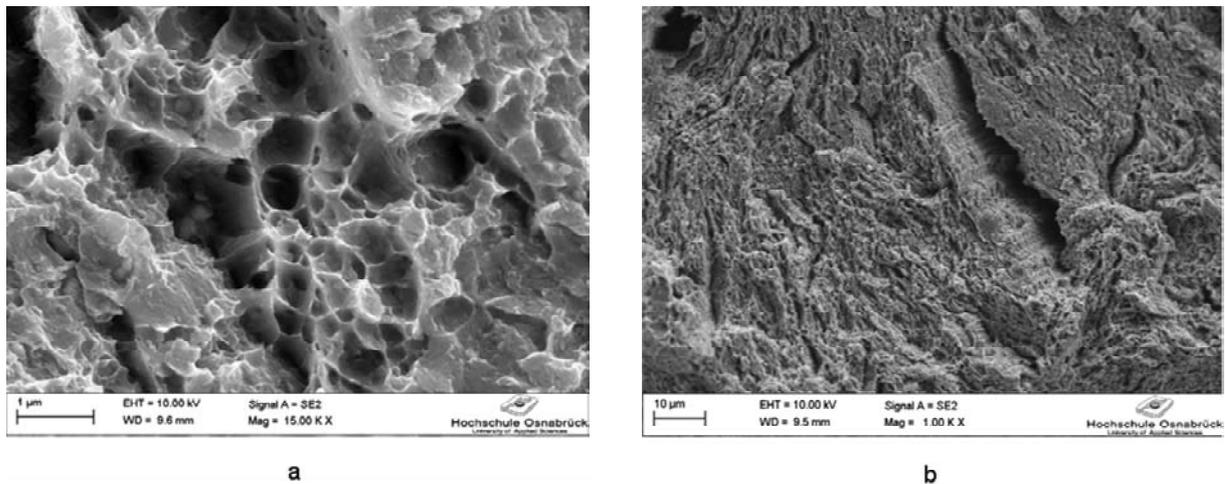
Fracture surface of the Al-ZnAl₂O₄ composite after tensile testing: (a) dimple fracture surface and (b) secondary cracks, resembling the oxide bands within the composite flakes after ball milling.
